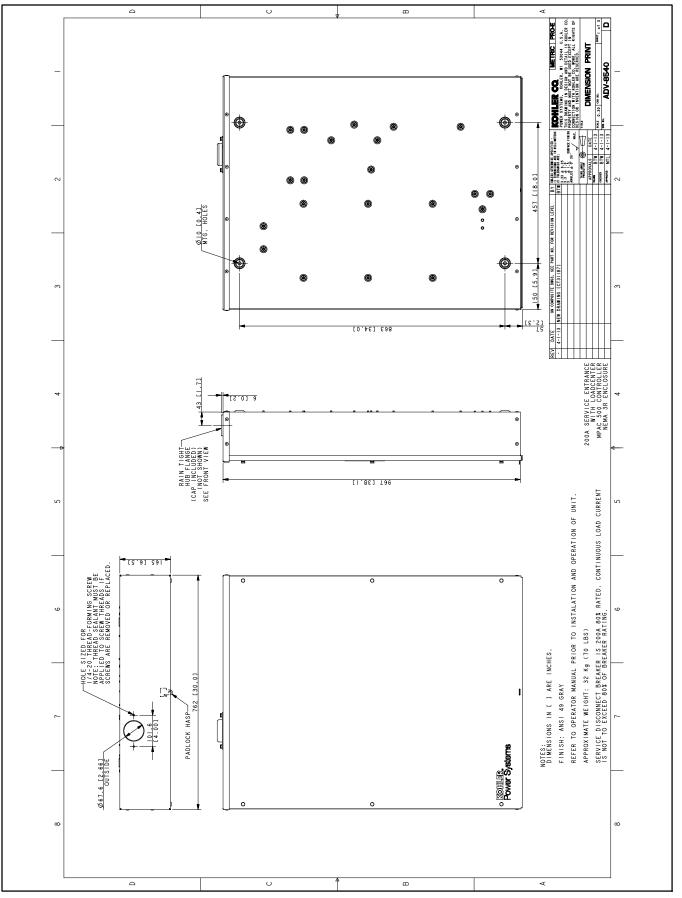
Dimension Drawing, 200 Amp Service Entrance Model with Load Center, ADV-8540, Sheet 1 of 3
